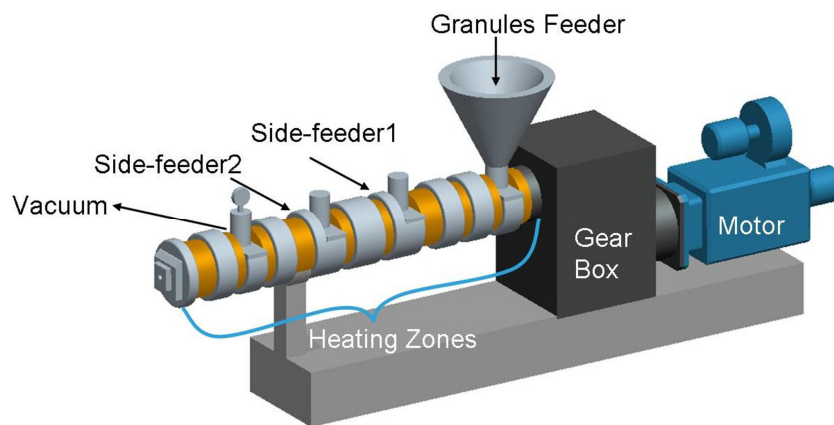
Schematic illustration of a twin-screw extruder.
